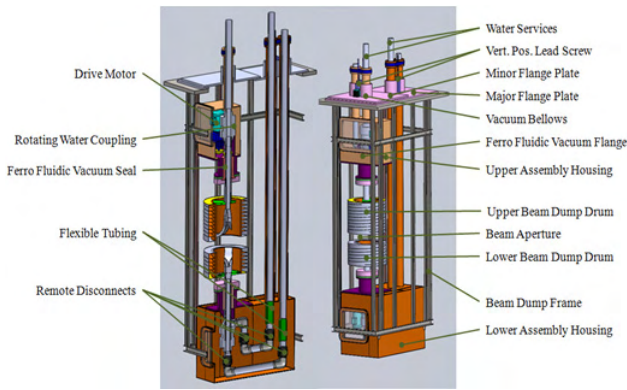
Locations and descriptors of the main mechanical components of the rotating water-cooled beam dump concept. The left panel shows a cut view of the assembly. The right panel is slightly rotated and shows transparent upper and lower assembly housing panels.
